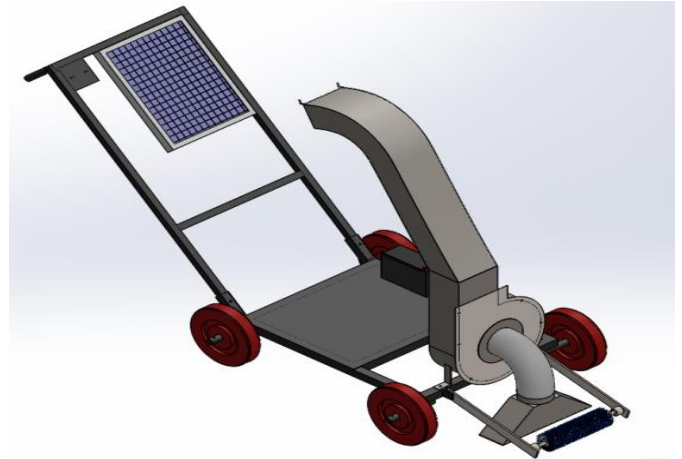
Assembly of Solar Floor Cleaner CAD Model
